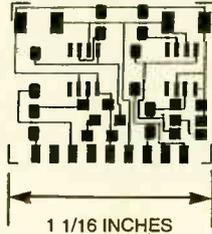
Use this full-size template of SIP-7's printed-circuit layout to etch your board.
